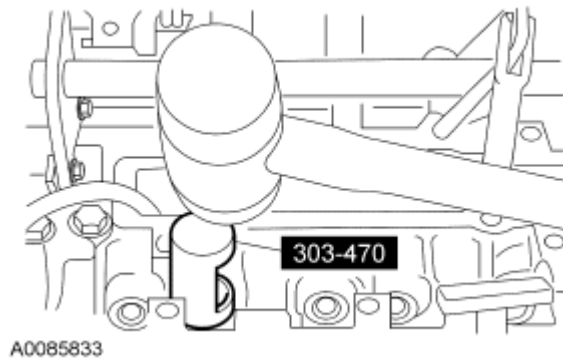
Installing Valve Seal Using Special Tool (303-470)
